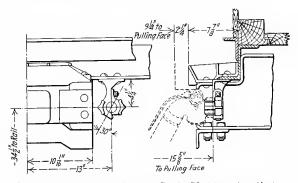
Security Angle Cock Holder Applied to Box Car. Adreon Manufacturing Company.
